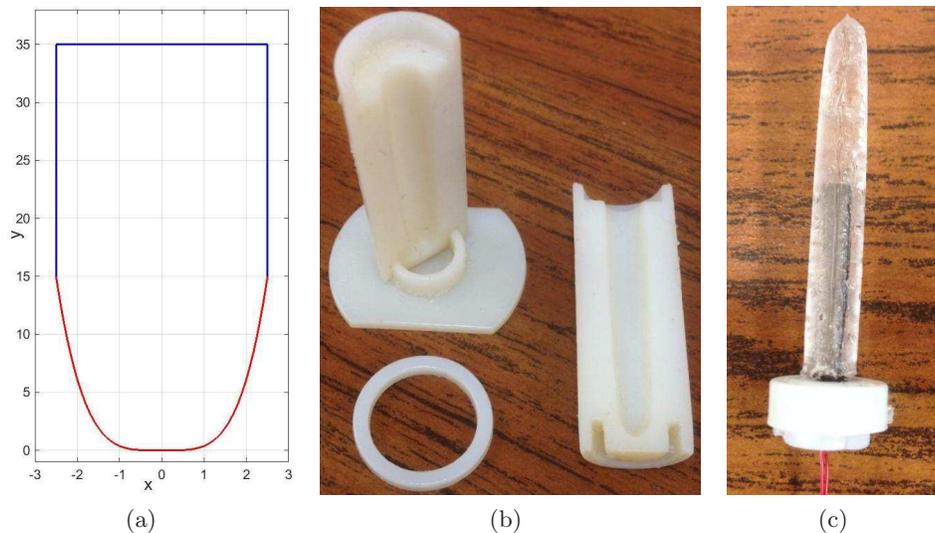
Fabrication of cupula-like structure: (a) shape design; (b) 3D-printed mold parts; (c) IPMC sensor coated with cupula-like PDMS.
